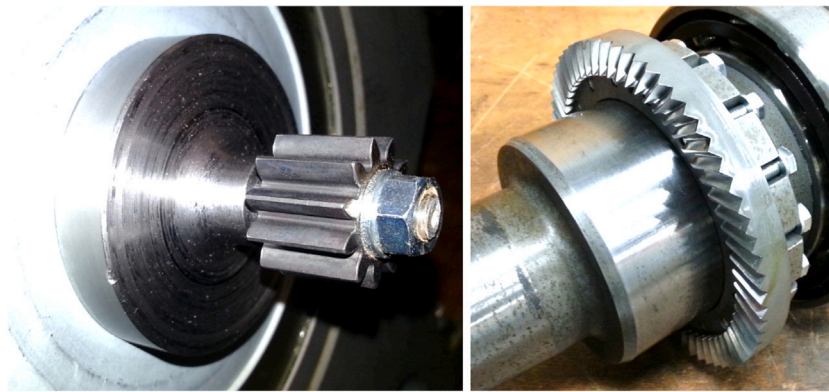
Test gears to measure the efficiency of a face-gear stage: (left) pinion mounted on the drive shaft; (right) Face-gear mounted on the output shaft.
